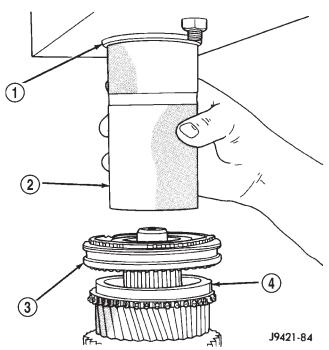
Pressing 3-4 Synchro Assembly On Output Shaft
